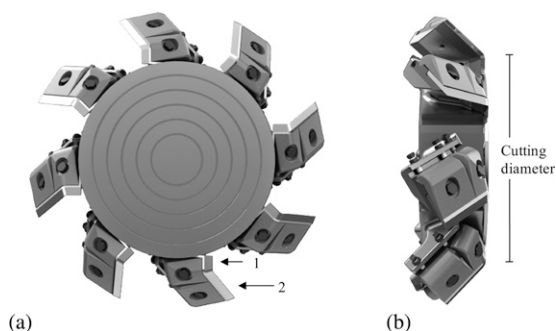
Front (a) and side (b) views of a conical-shaped cutterhead fitted with eight uniformly distributed knife holders, each with a bent knife and a knife clamp. The bent knife had two cutting edges that were joined at an angle: 1) the shorter edge smoothed the cant (canting edge) and 2) the longer edge severed a slice to produce chips (chipping edge) (Courtesy of DK-SPEC Inc.).
